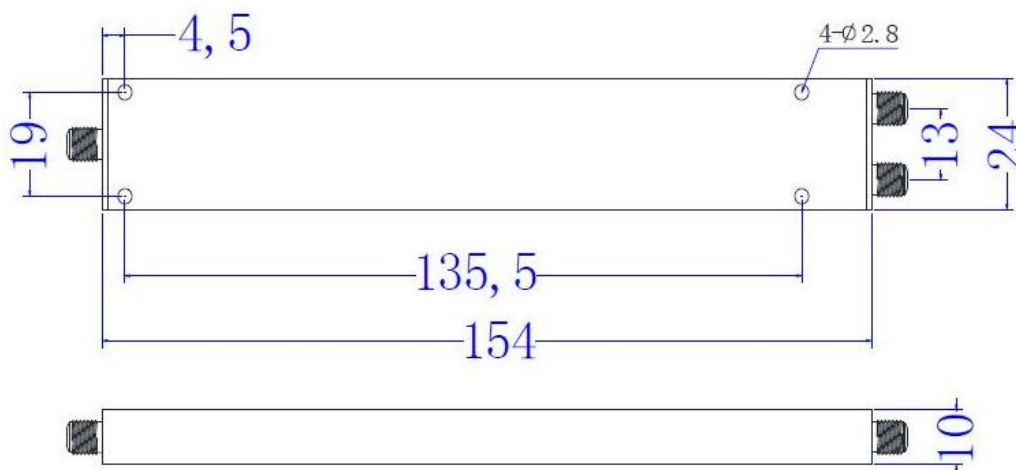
JX-PD2-0.5G18G-30WS front panel layout
